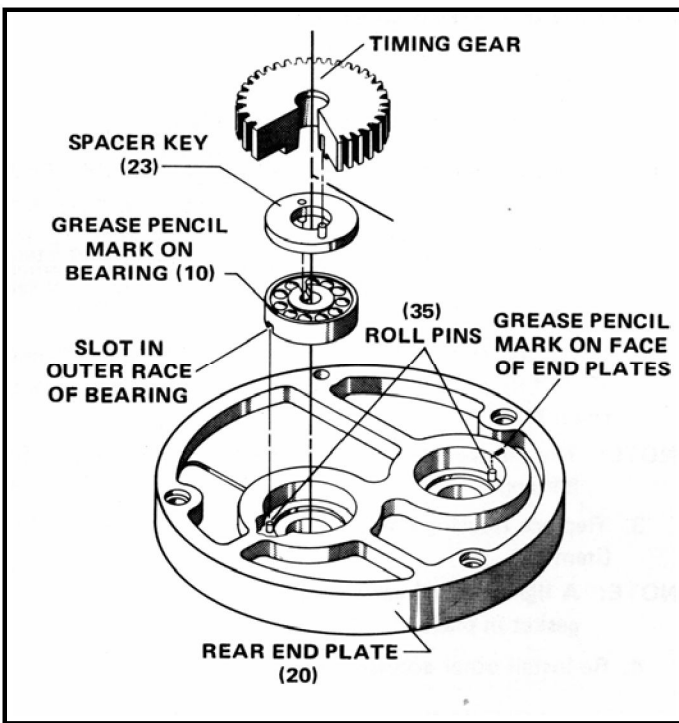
Typical End Plate, Bearing, Spacer Key and Timing Gear Alignment Detail
